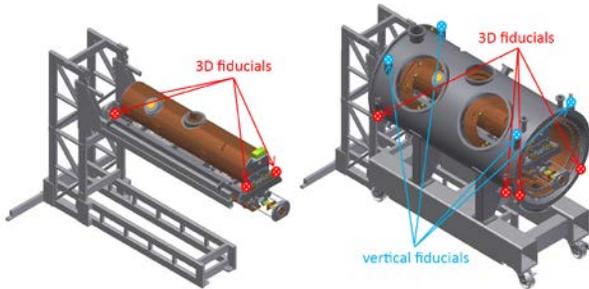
Vacuum vessel is moved into the cold mass and aligned.
